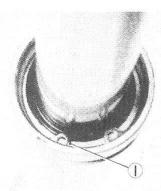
The forks used on YT 200 models are equipped with a snap-ring that must be removed to separate the fork tubes and replace the seal (Sec 5)
